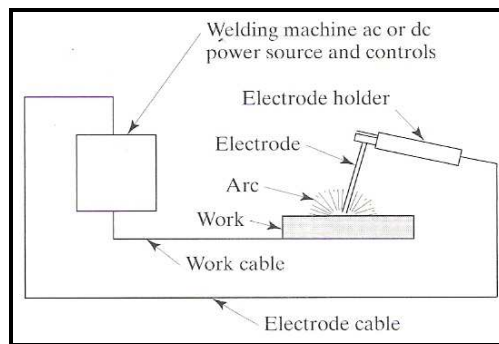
1: Schematic illustration of the shielded metal-arc welding operation [4].
